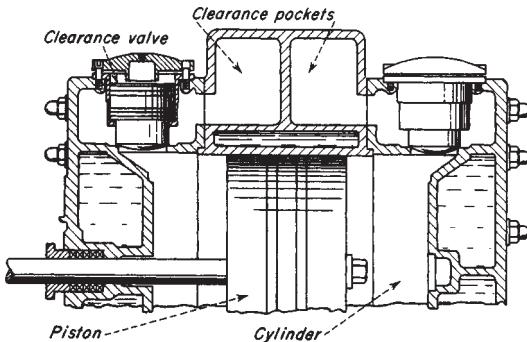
Clearance-control cylinder. (Courtesy of Ingersoll-Rand.)
